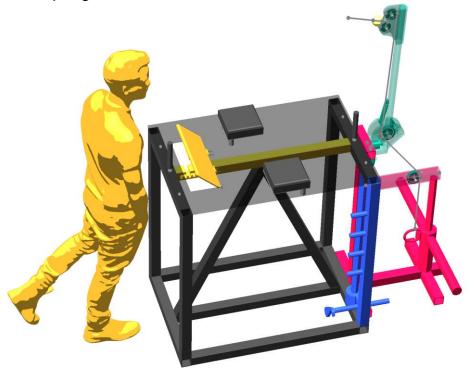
Final CAD of the Assembly, oriented in the same position of the final design hand sketch.
